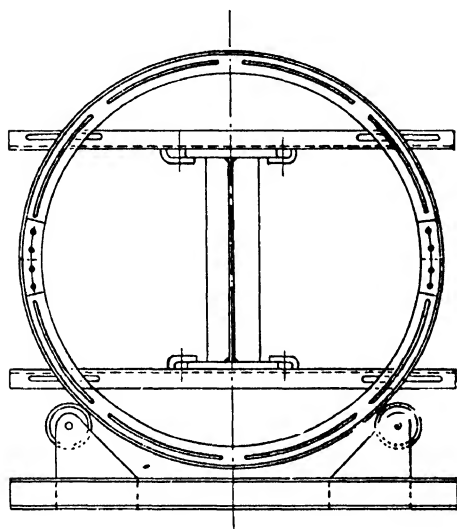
ROTATING JIG FOR ASSEMBLING AND WELDING PLATE GIRDERS OR OTHER STRUCTURAL UNITS
